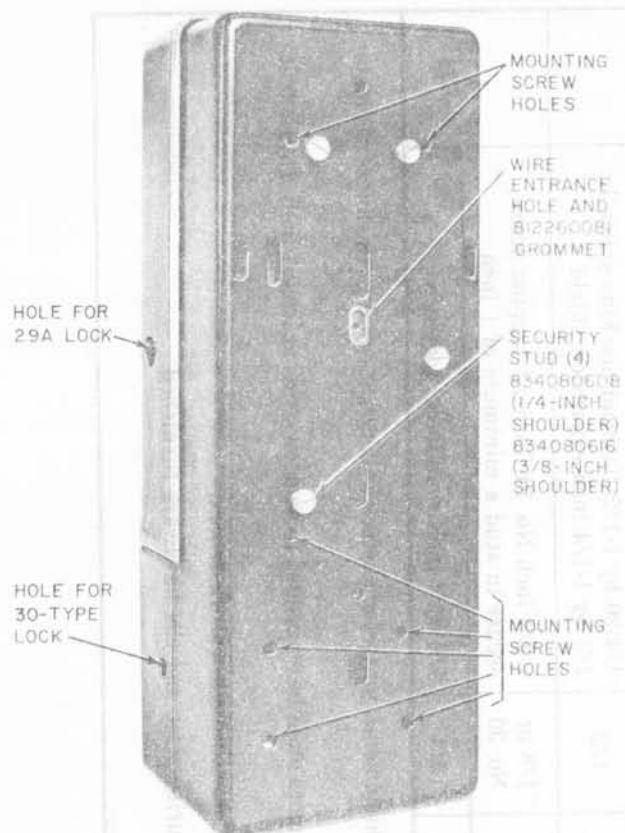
Location of Mounting Screw Holes and Security Studs in 1-Type Set
